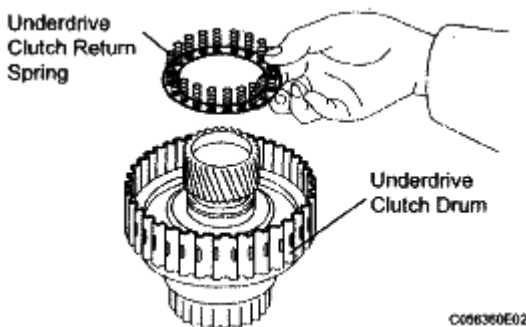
Removing Return Spring From Underdrive Clutch Drum
